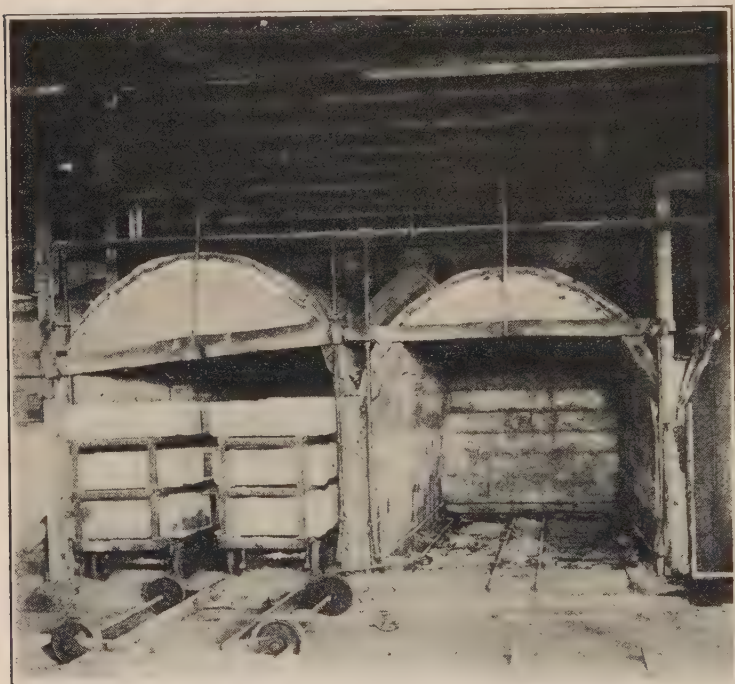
CONCRETE BLOCK STEAM ROOMS.
